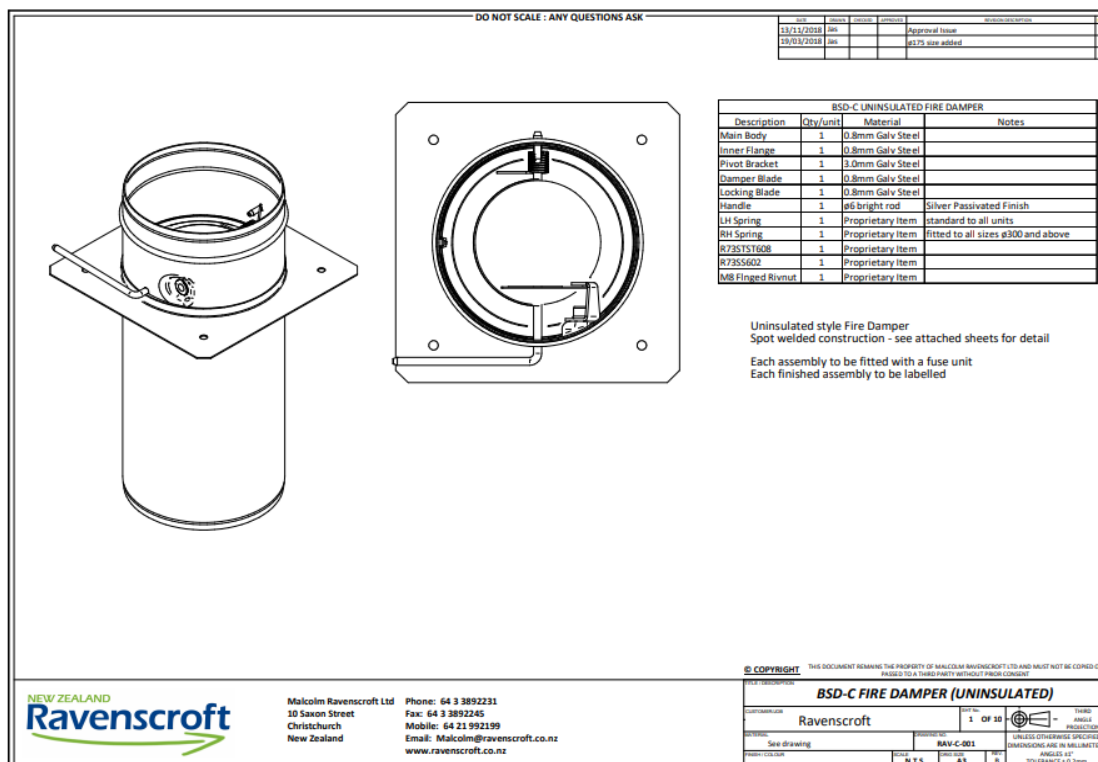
BSD-C uninsulated fire damper details – 1 (provided by Ravenscroft)
